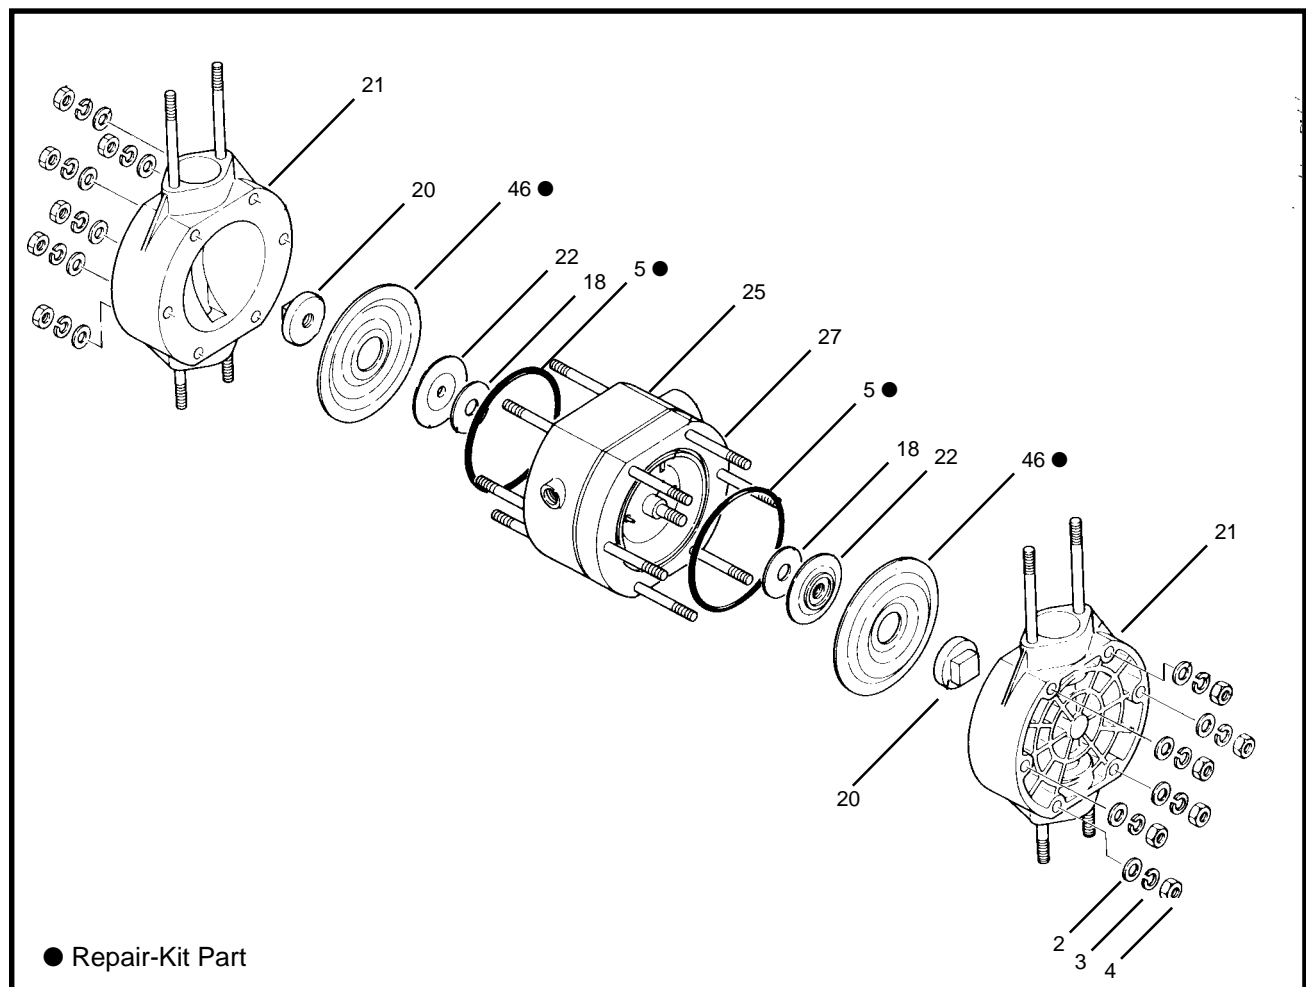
Components of Diaphragm Portion of Pump with Manifolds Removed
